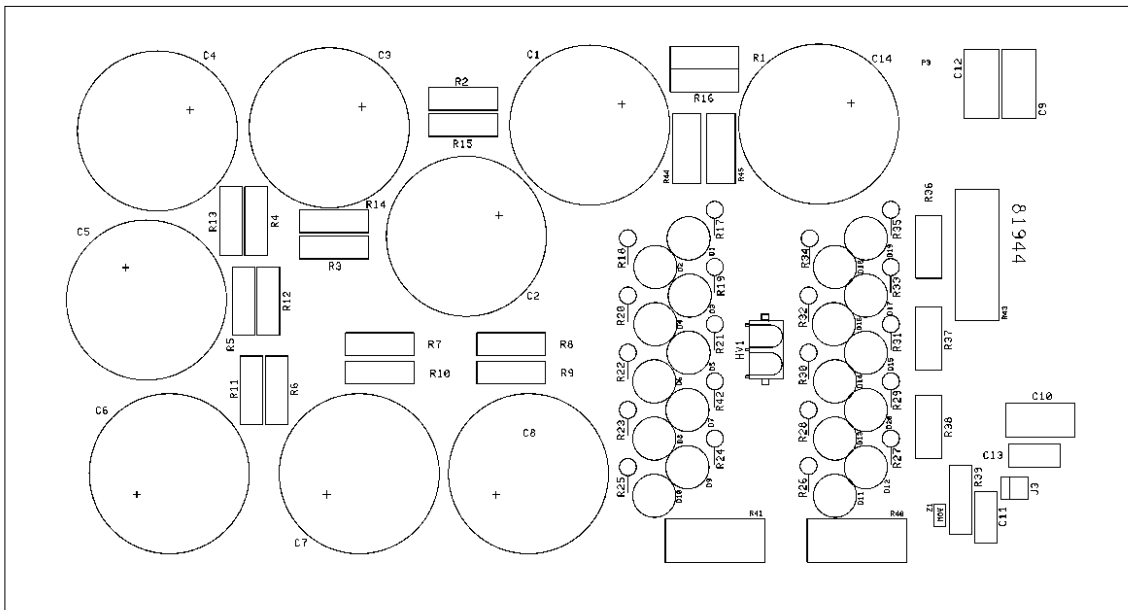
INPUT MATCHING BOARD (ASSEMBLY A6) COMPONENT LAYOUT TOP VIEW
